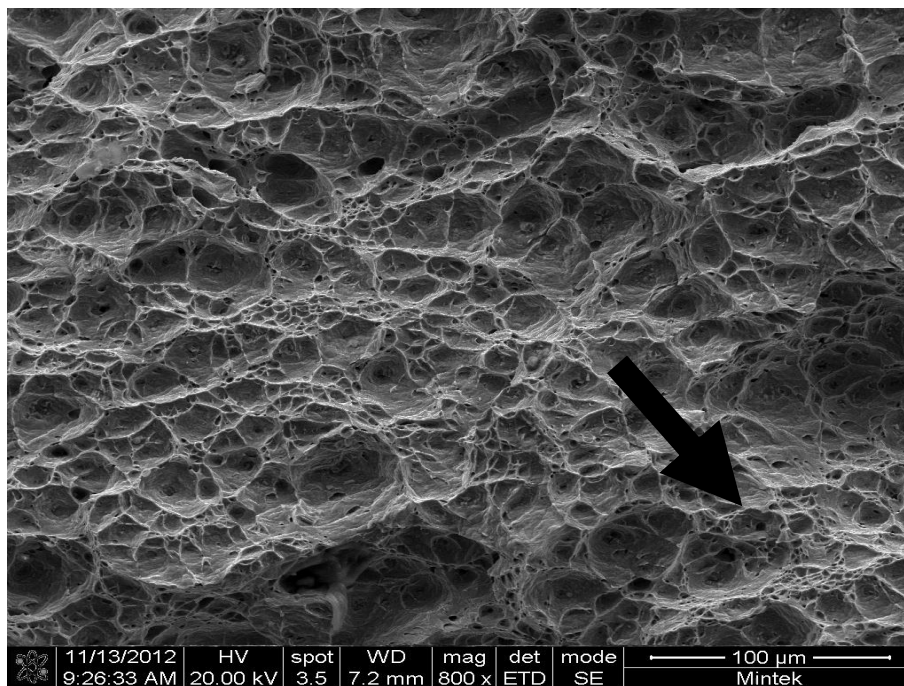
Rupture zone of AISI 316L sample carburised at 450°C showing ductile dimple fracture.
